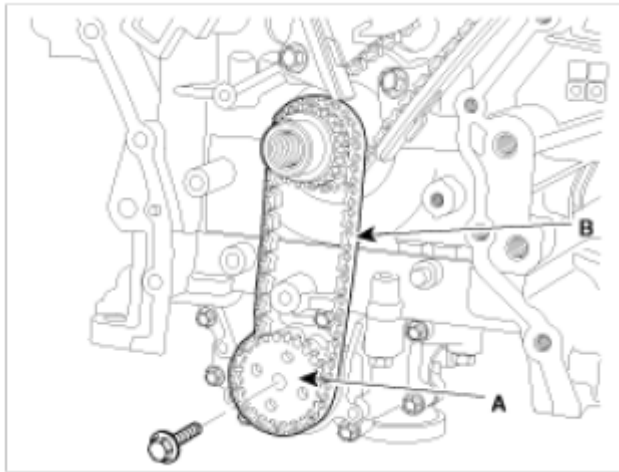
Identifying Oil Pump Chain Tensioner Assembly
